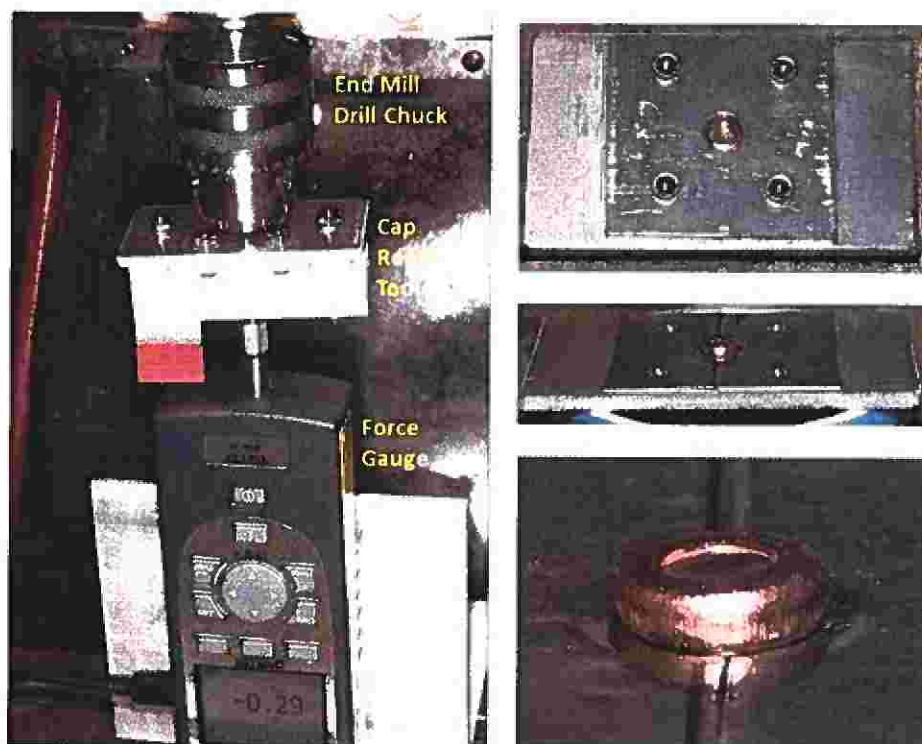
Cap removal tool and system. The left photograph shows the setup for the subject cap removal and force measurement. The right photographs show the in-house built cap removal tool fully assembled (top) and with the top plate removed (center and bottom).
